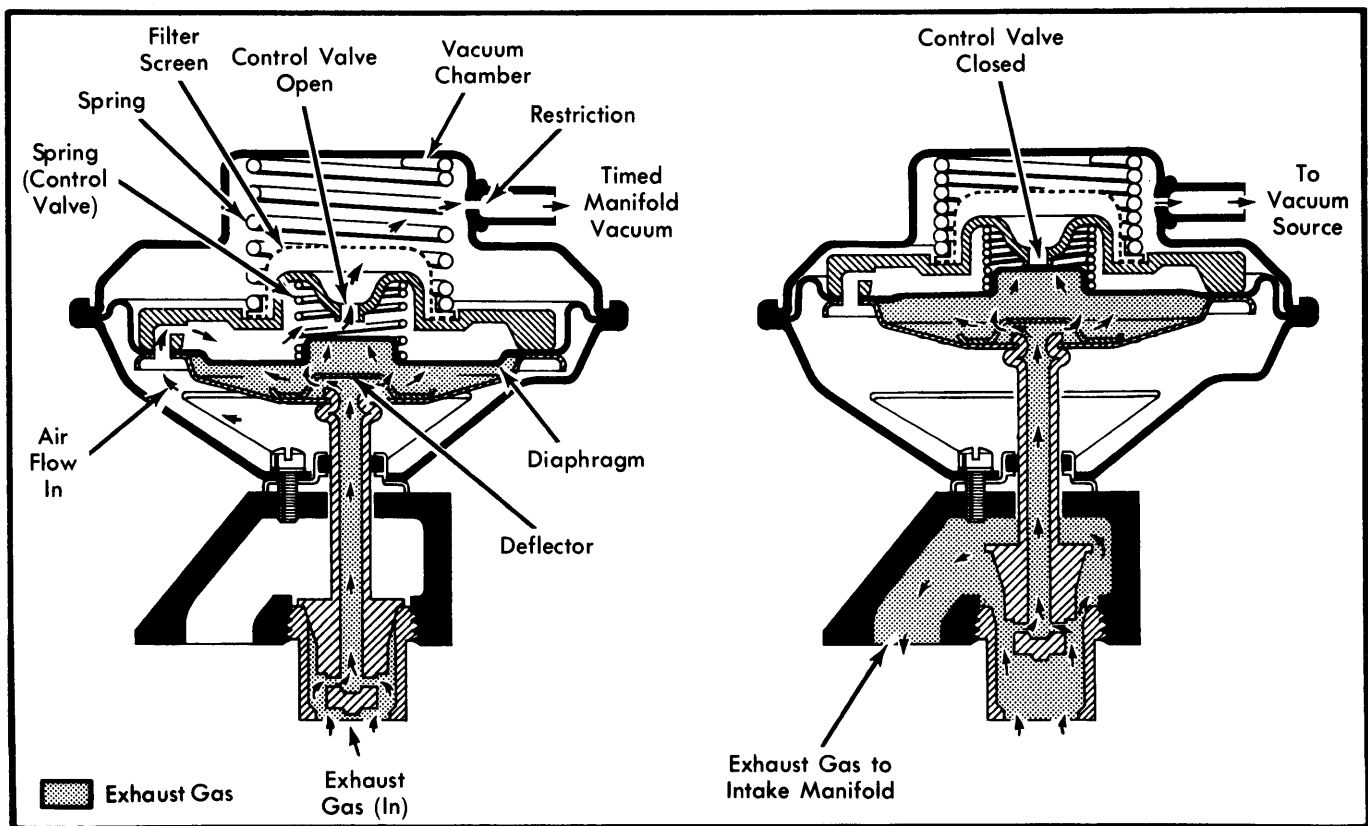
Cutaway View of Positive Back Pressure EGR Valve
